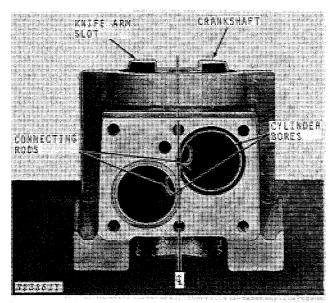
Lining Up Crankshaft and Connecting Rods in Casting
